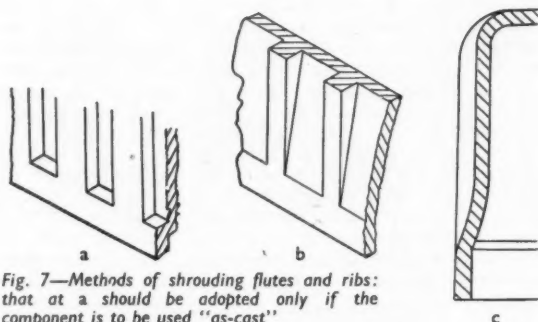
Methods of shrouding flutes and ribs: that at a should be adopted only if the component is to be used "as-cast"
